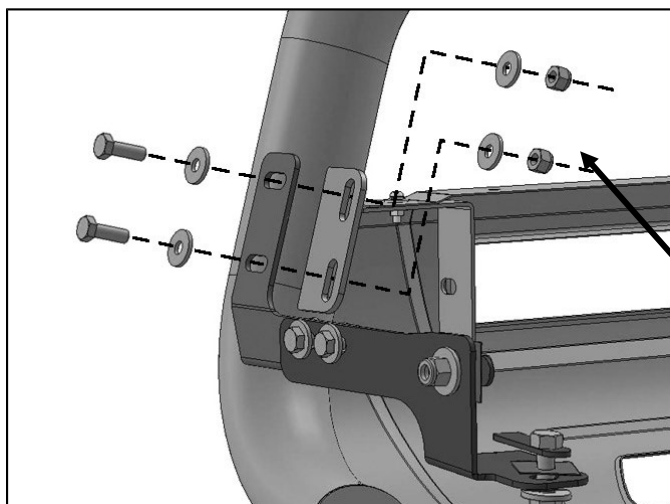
Attach driver/left Frame Bracket to 12mm Bolt Plates in end of frame
